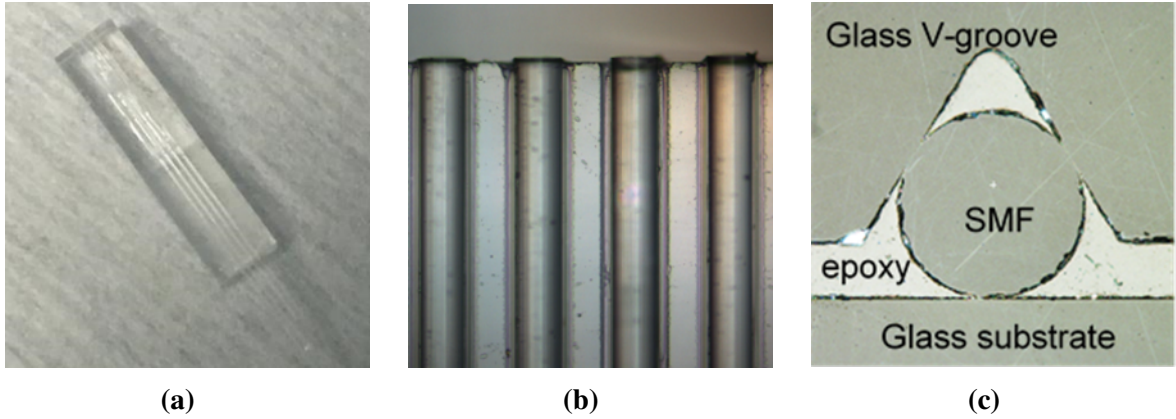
(a) A glass v-groove chip with four fibers assembled, (b) a magnified image of the edge of the v-groove chip, and (c) the cross section of a fiber assembled v-groove chip flipped and bonded on the glass substrate.
